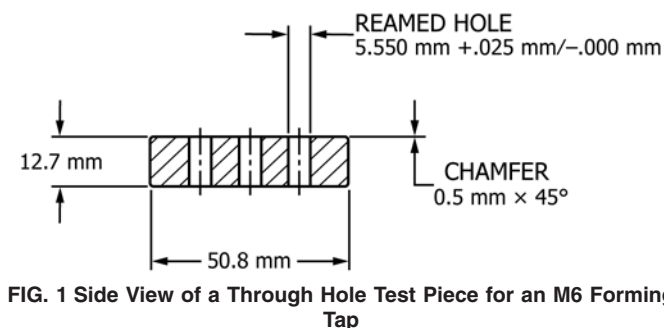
Side View of a Through Hole Test Piece for an M6 Forming Tap
